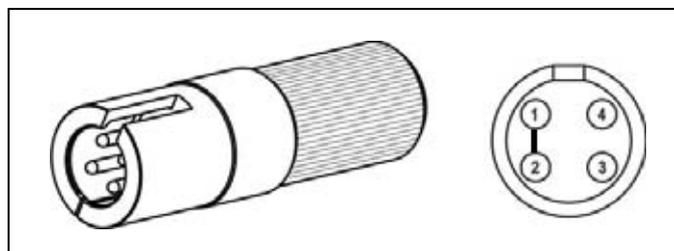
Male plug connector cod. 09-9767-00-04 (front view).
